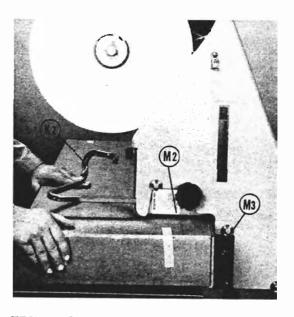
TOP TAPING POSITION RIGHT SIDE VIEW
